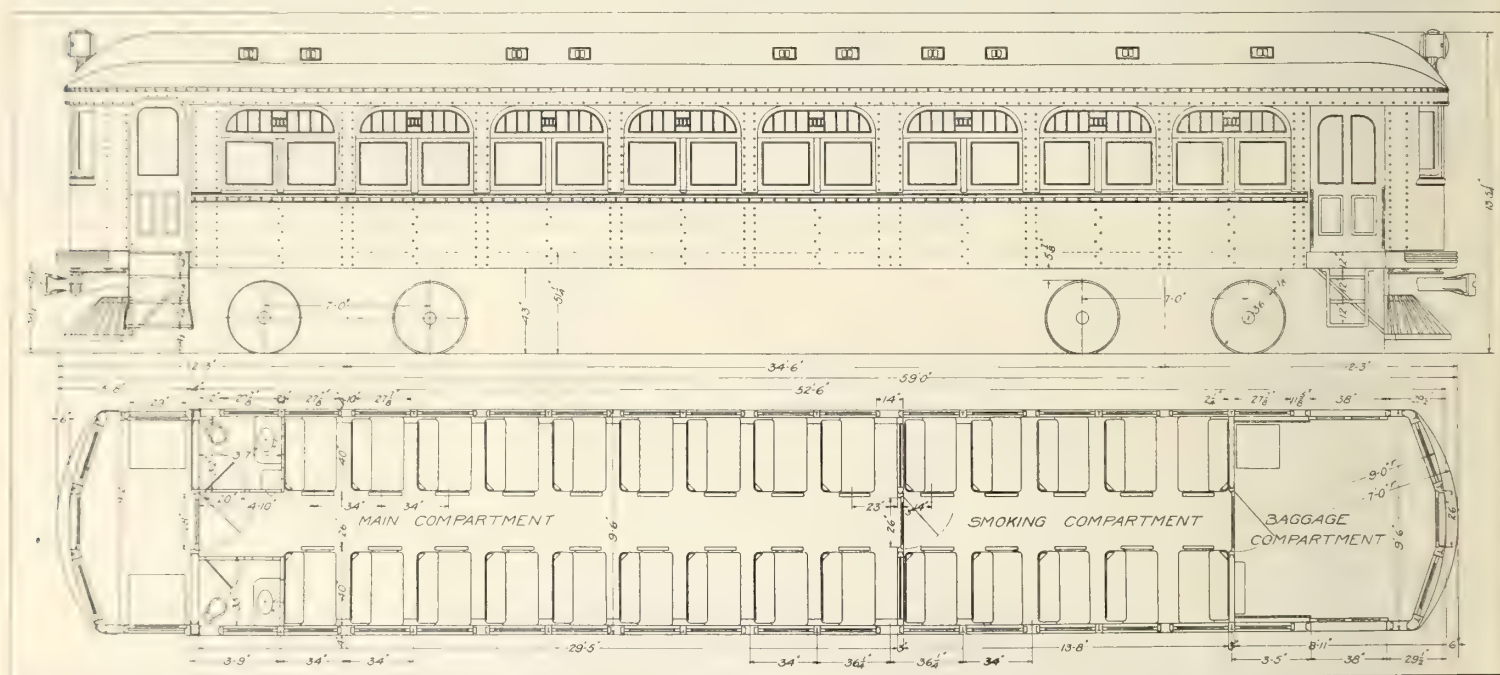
Plan and Elevation of All Steel Motor Cars for London & Port Stanley Railway.
